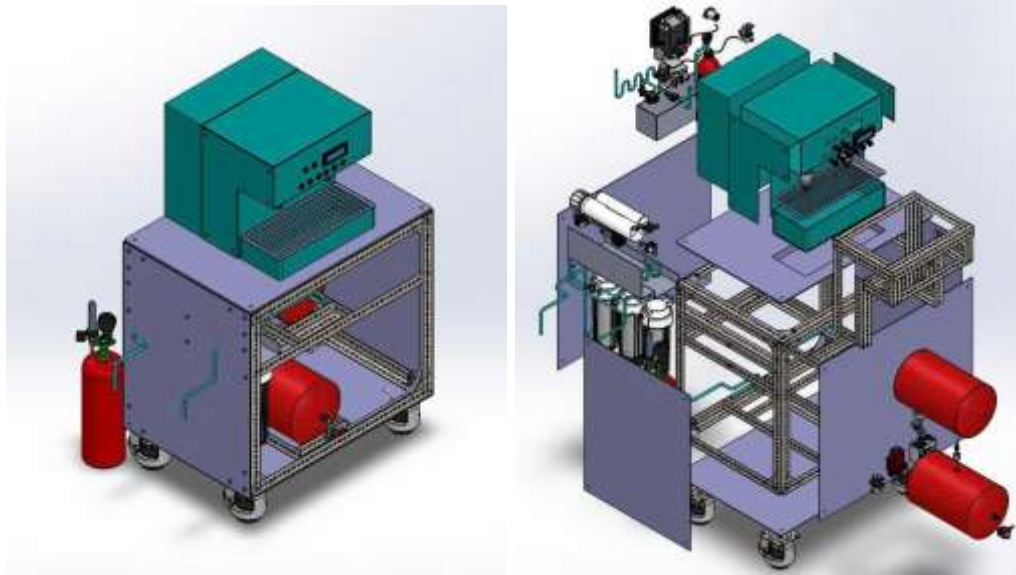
Image of overview model (left) and exploded model (right) of the machine
